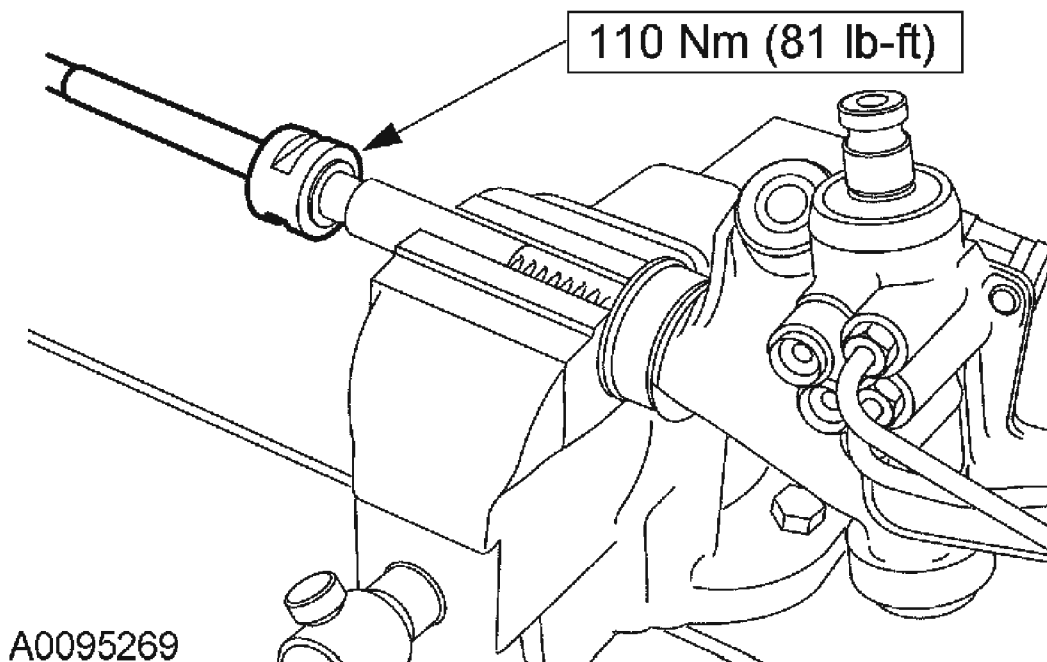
Securing Steering Gear In A Vise And Using Suitable Removal Tool To Remove Tie-Rod
